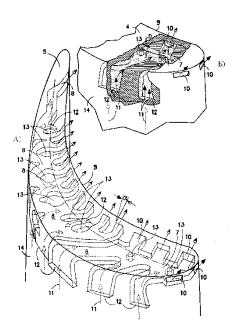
A) General view of the blade end B) Enlarged view of the blade end on the leading edge
